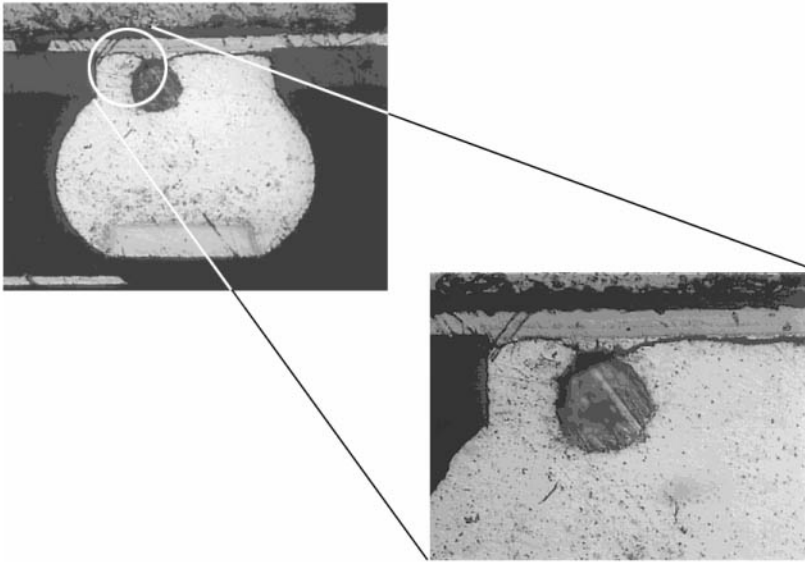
X-section of Flex-Substrate BGA thermal fatigue failure — the primary crack propagation site is at the solder joint to package interface.
